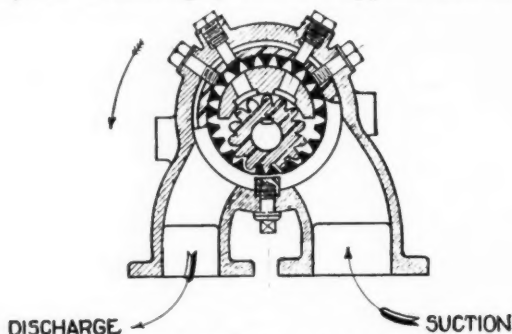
The rotary oil pump used as an electrically driven auxiliary to provide cooling and lubricating oil when the engine is not running. At 1,800 r.p.m. it delivers 156 gallons a minute. The ring gear is only $4\frac{1}{2}$ " inside diameter, the pinion about $3\frac{1}{8}$ " outside diameter, and the $5\frac{1}{8}$ " length of the teeth is $3\frac{1}{2}$ ".
